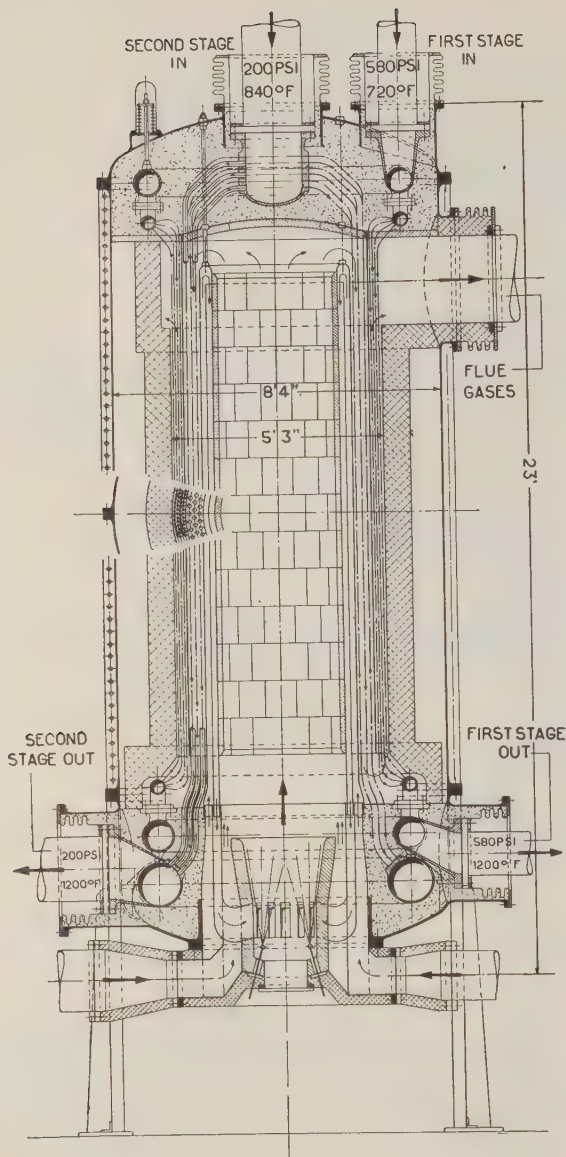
OIL-FIRED AIR HEATER FOR 6000-KW SET SUPERCHARGED
